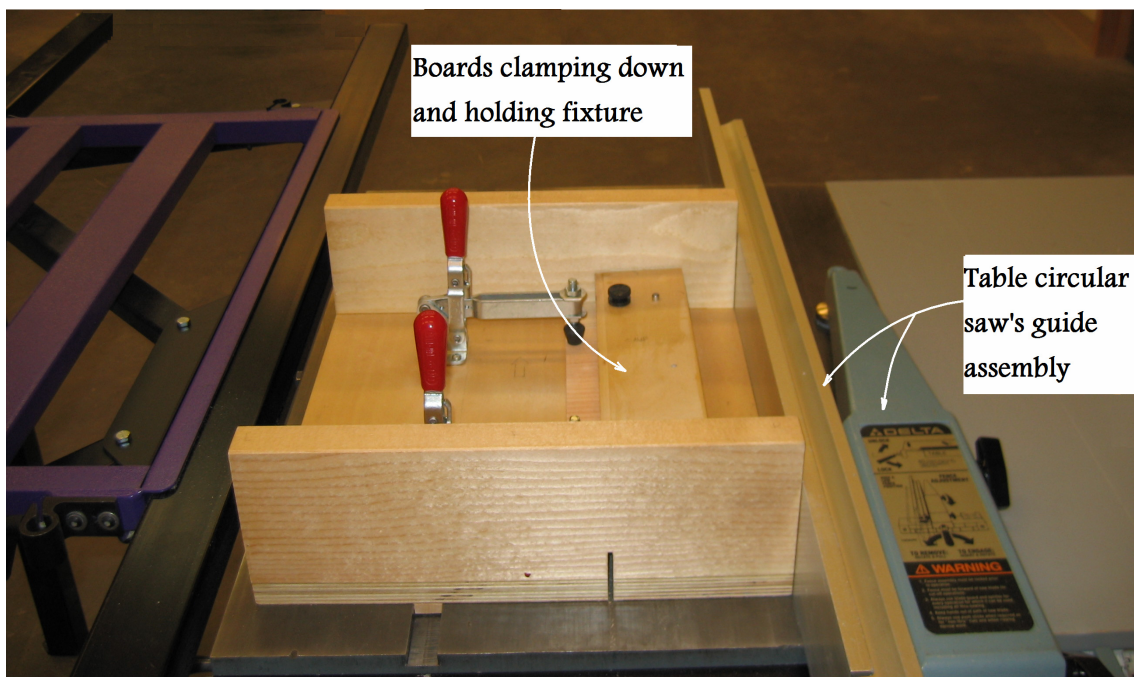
A fixture designed to prepare radial strips with a cross section of 3mm by 5mm
